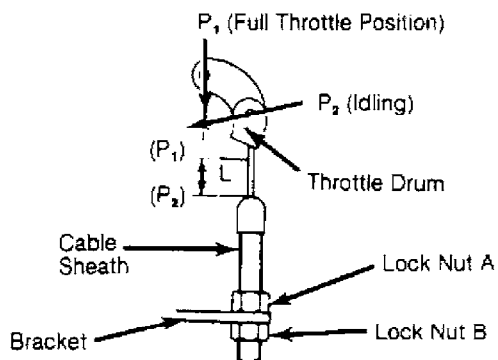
Adjusting Throttle Cable (Sentra Shown; Others Similar)
